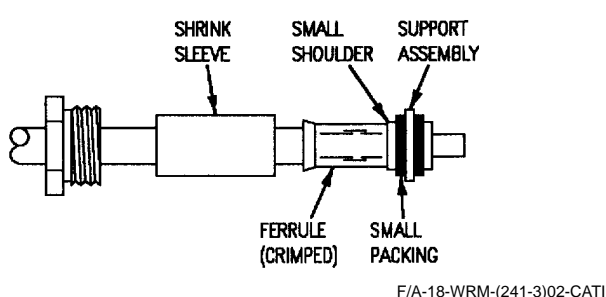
4545-6010 Coaxial Connector Repair (Sheet 1)
